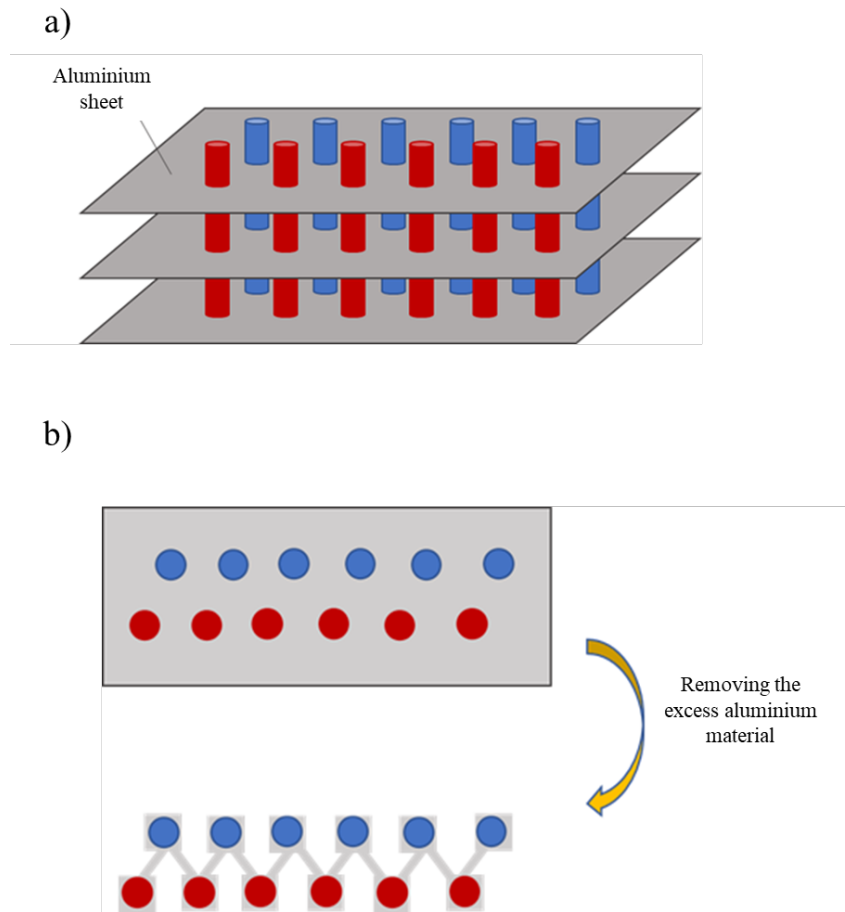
(a): Original Aluminium sheets; (b): Final cuts trough aluminium sheets
